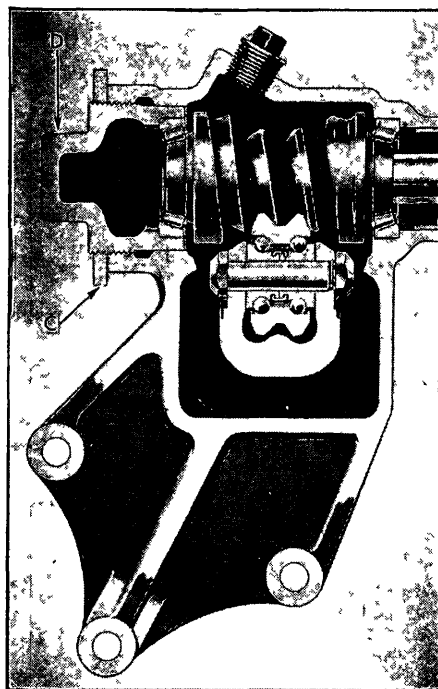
C Chevrolet 1949-52. Worm bearing adjusting cup (D) and lock nut (C)
